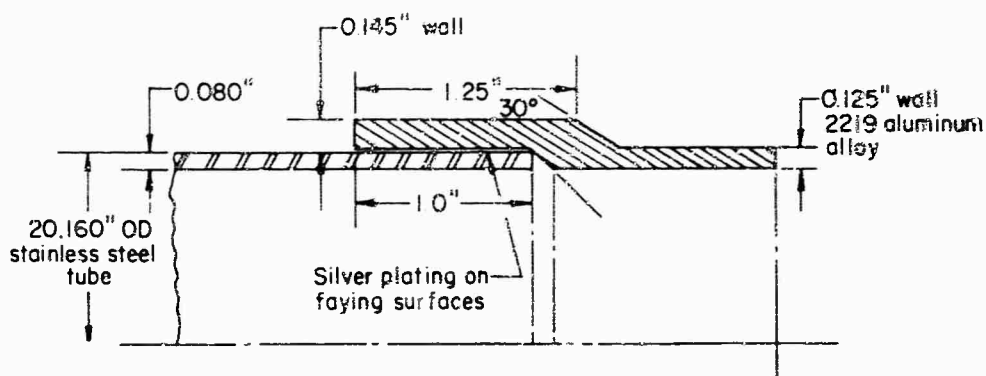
JOINT CONFIGURATION OF 20-INCH-DIAMETER TUBULAR WELD ASSEMBLY (49)
